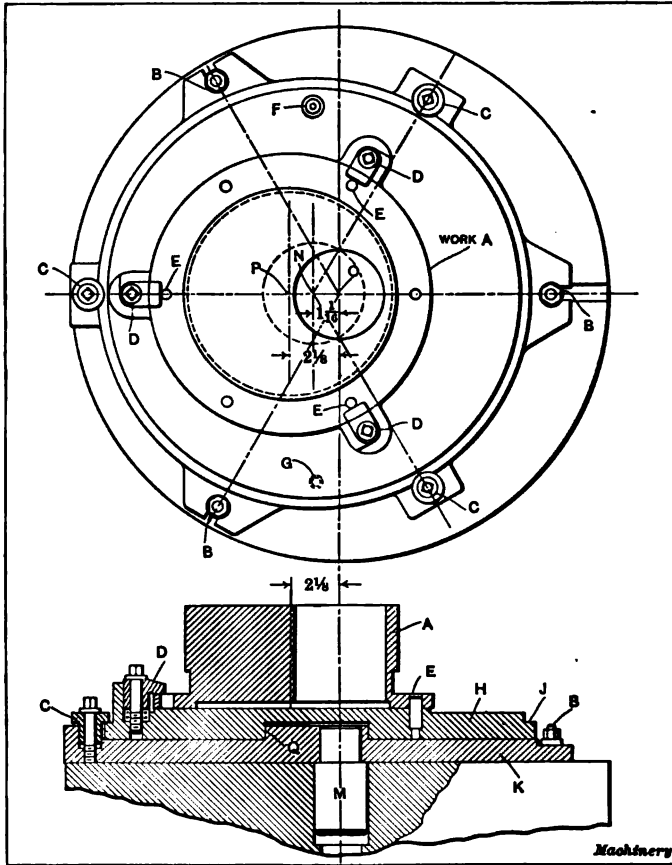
Indexing Fixture for Turning and Boring Eccentric
